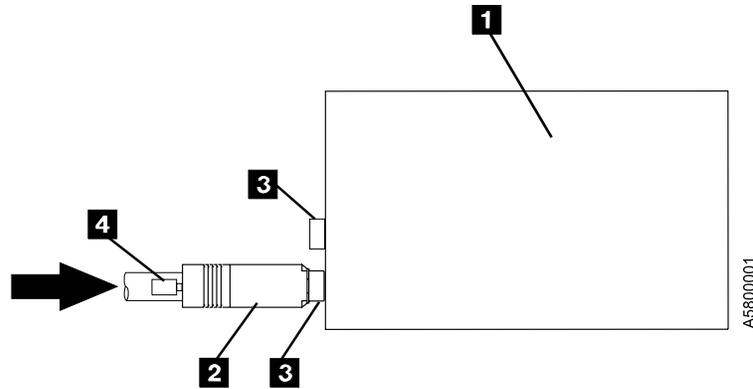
Connecting the SCSI Bus Cable to the 7205 Digital Linear Tape Drive
